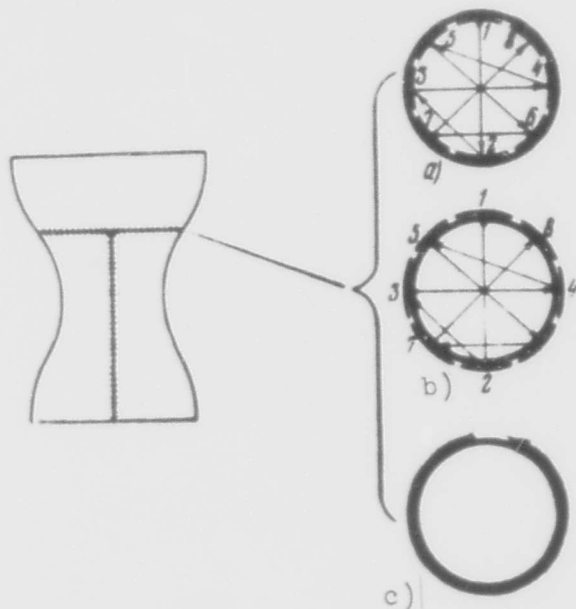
Welding of middle ring with nozzle of combustion chamber.
